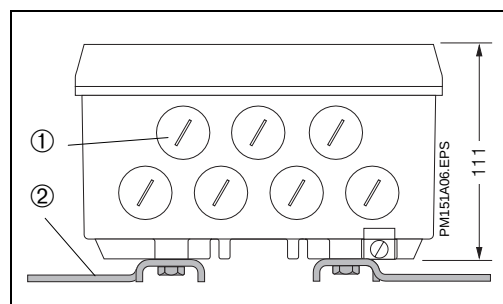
Bottom of field housing with brackets installed for wall mounting
